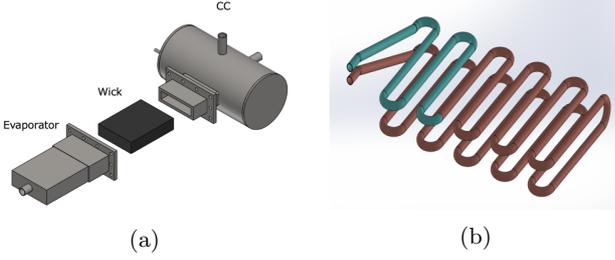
(a) CAD model of CC, Wick and evaporator, (b) CAD model of condenser
